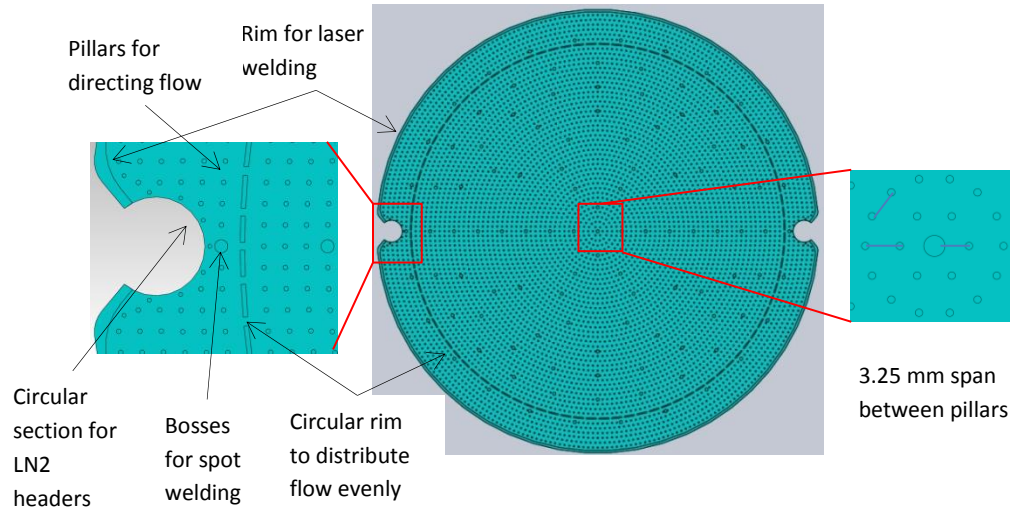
Top view of liquid nitrogen bottom plate showing inlet, rim for welding, spot welding bosses, circular and rectangular pillars and flow distribution and span between pillars.
